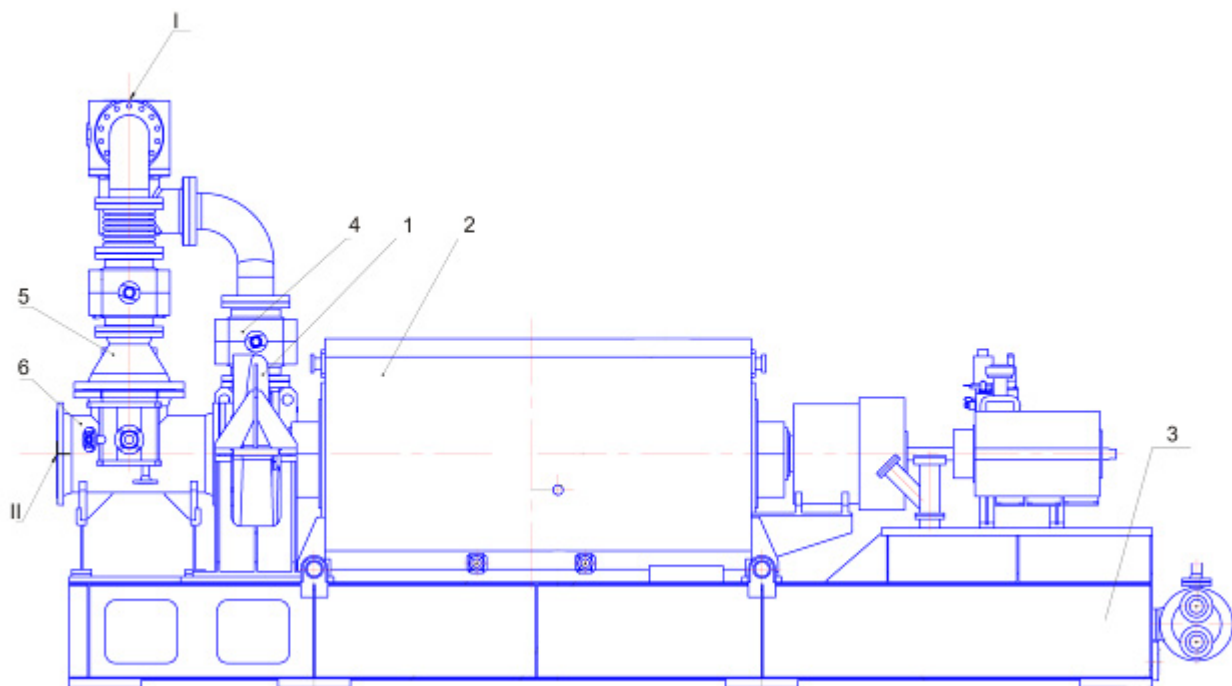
Turbo-generator of Pauzhetsky Binary GeoPP (I – steam supply to turbine, II – steam takeoff into condenser, 1 – turbine, 2 – generator, 3 – frame-oil tank, 4 – control valve, 5 – throttling device, 6 – exhaust arrangement)
